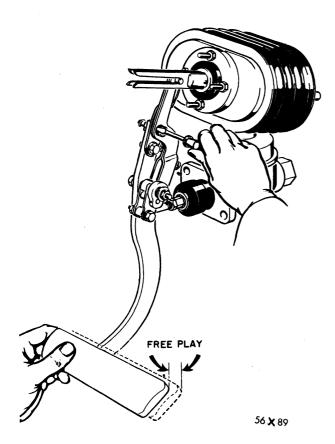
Checking Pedal Free Play (Bellows Type, Typical of Piston Type)
